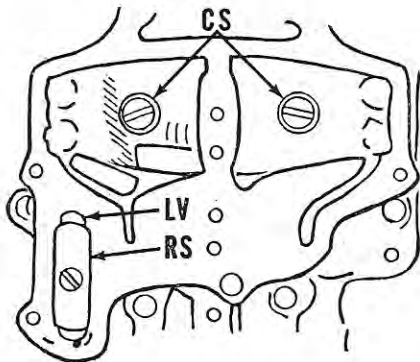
Crankcase with carburetor and inlet manifold removed. The reed-type crankcase bleeder valve (LV) and reed stop (RS) can be removed for service after manifold is removed. To disassemble crankcase, the two center main bearing capscrews (CS) in inlet parts must be removed.
